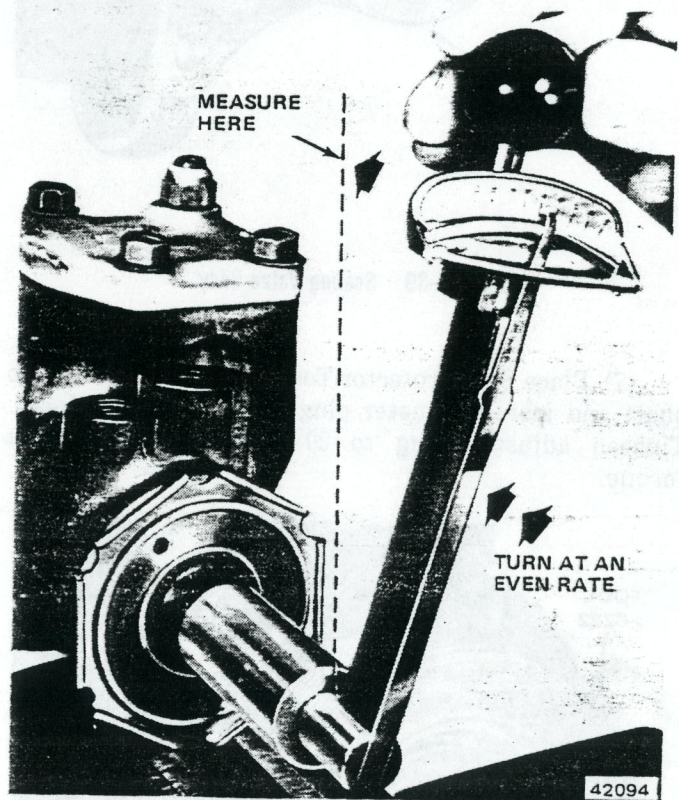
L-43 Measuring Wormshaft Bearing Preload
